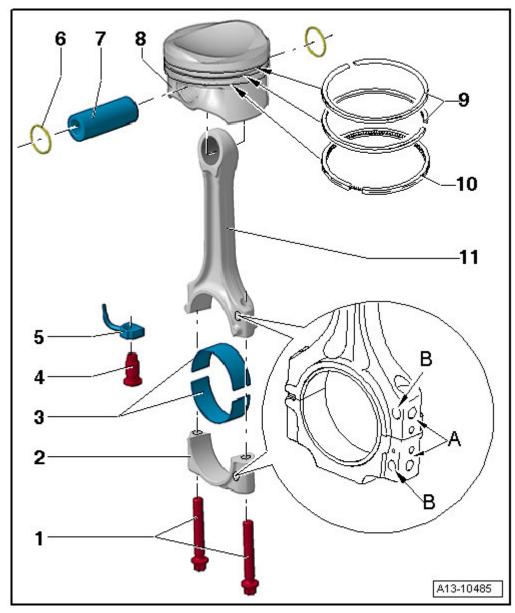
Identifying Assembly Overview: Pistons And Connecting Rod Courtesy of VOLKSWAGEN UNITED STATES, INC.
